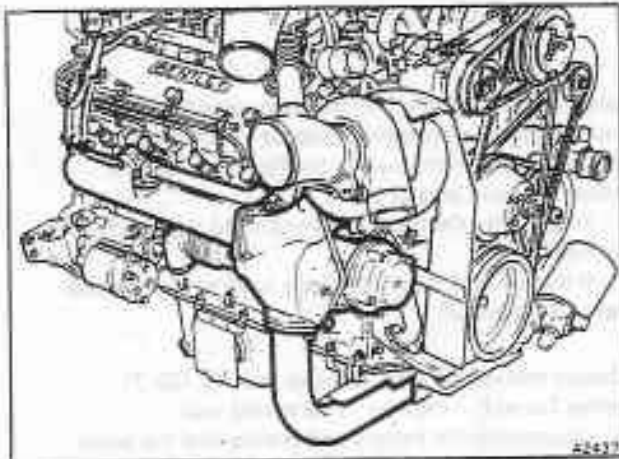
Split type exhaust manifold - 'A' bank
